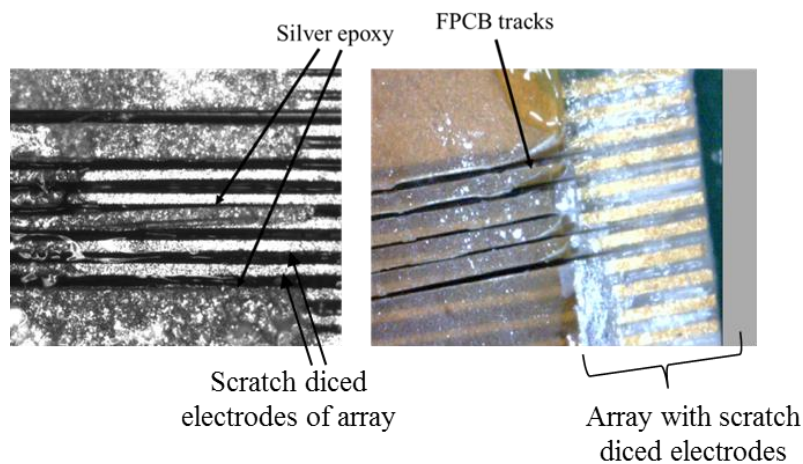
Damage to silver epoxy and frayed FPCB tracks following dicing
